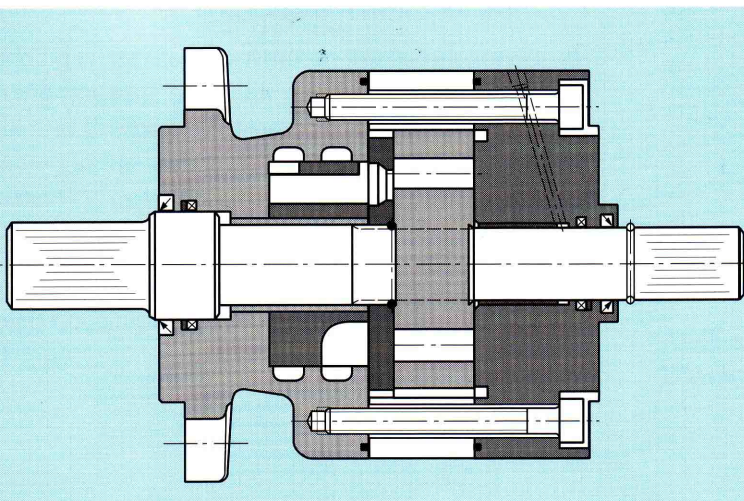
Epicyclic gear motor with through shaft, type MZD
